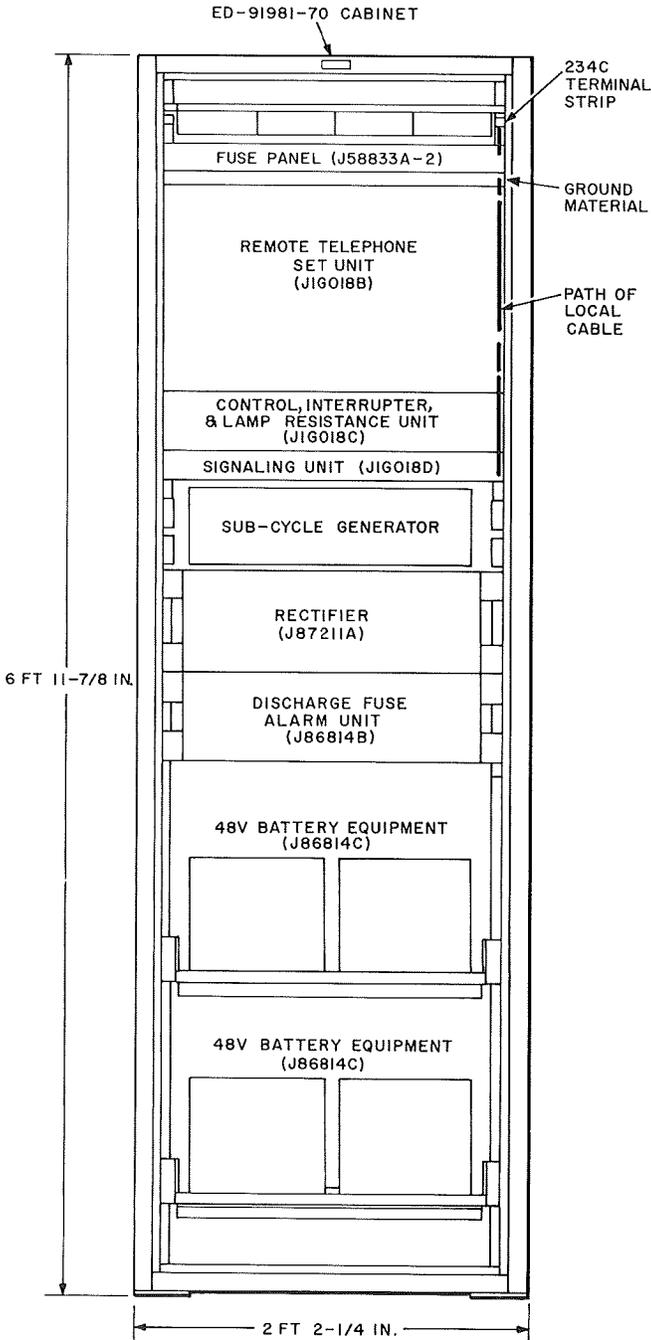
J1G018A Equipped Control Cabinet—Door Removed
